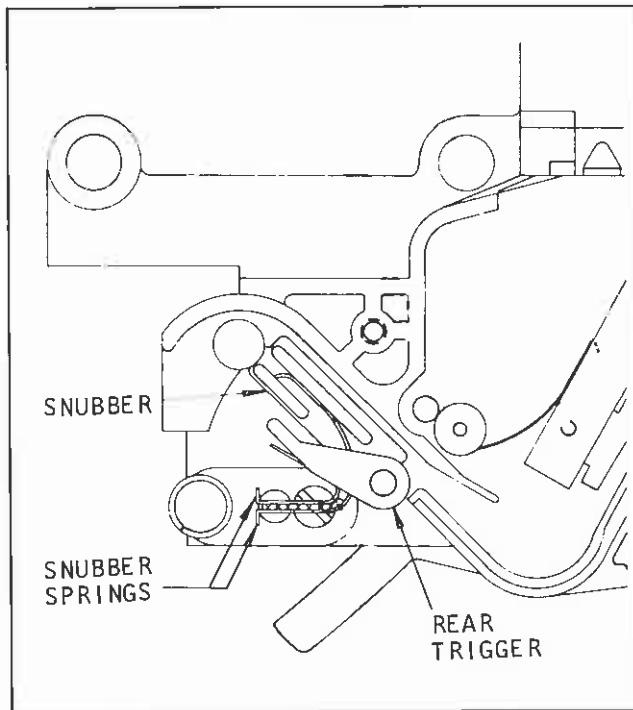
Figure K. Adjusting Auto-Rewind Trigger Mechanism
